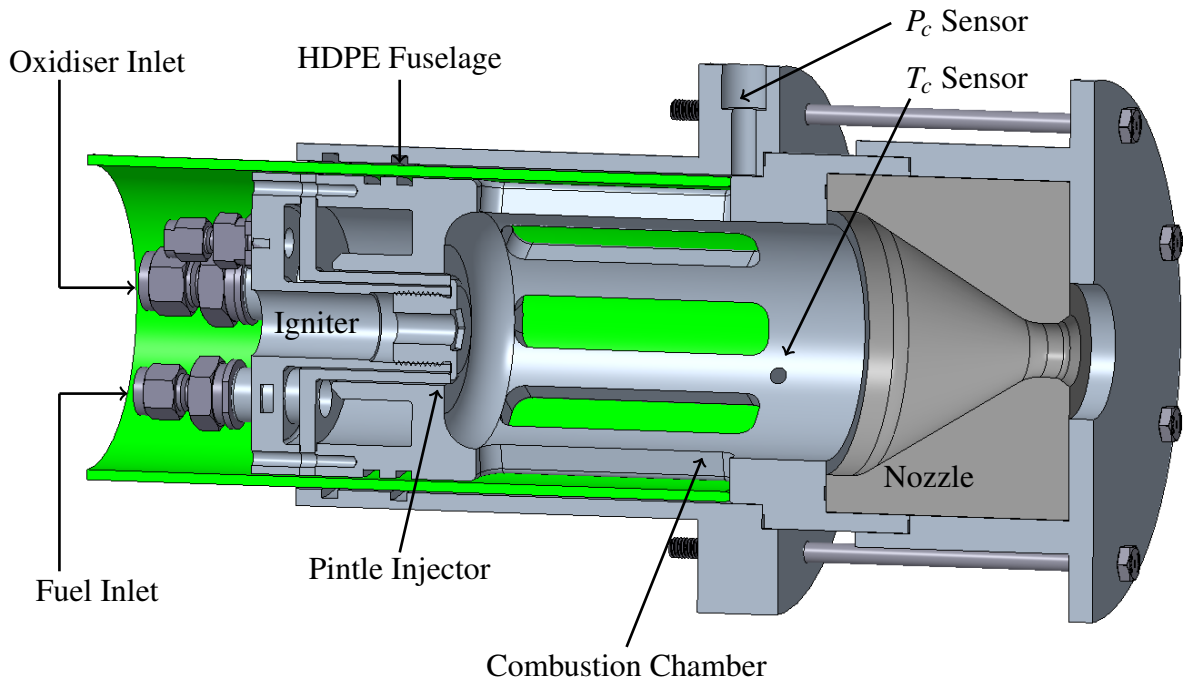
Ouroboros-2 and 3 engine assembly cross-section view.
